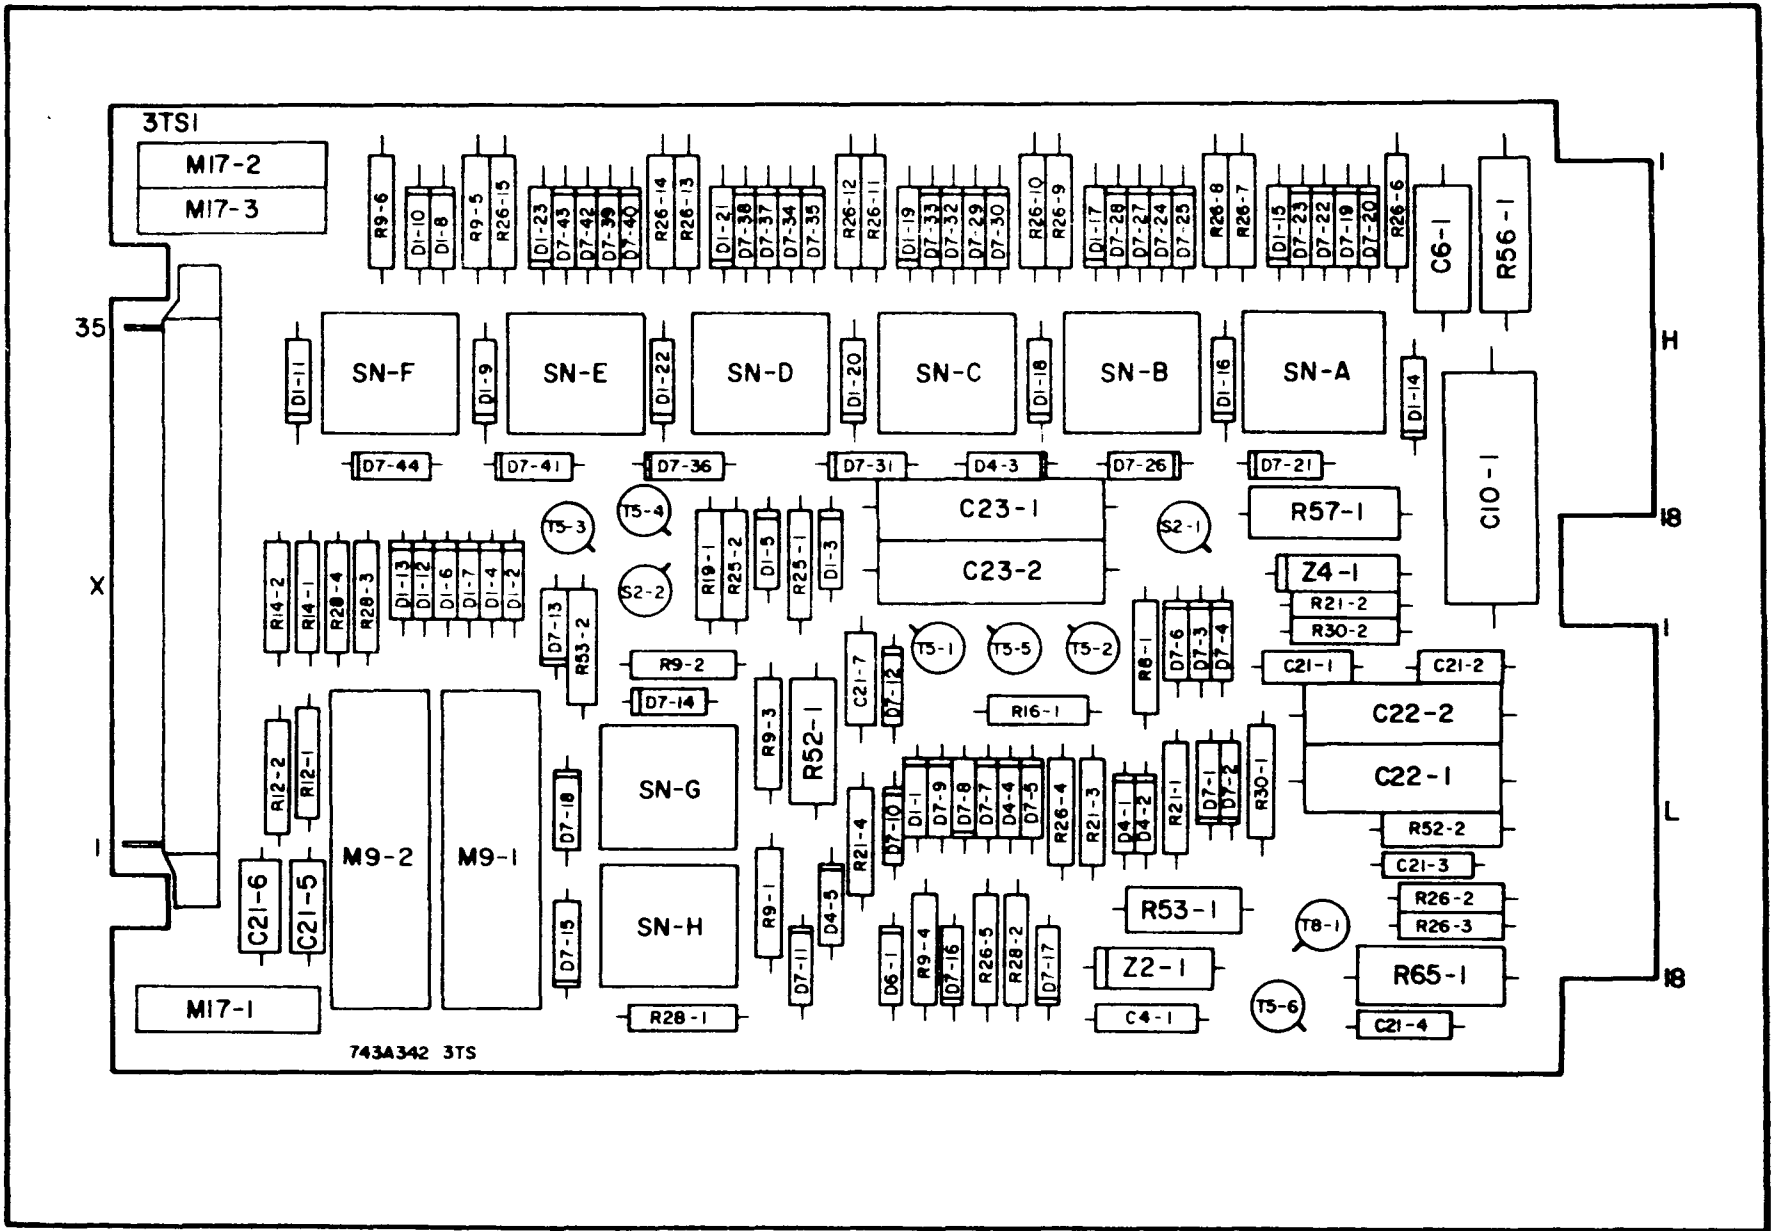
3TS1 ASSEMBLY (REF. DWG. 743A342, SUB 14)
